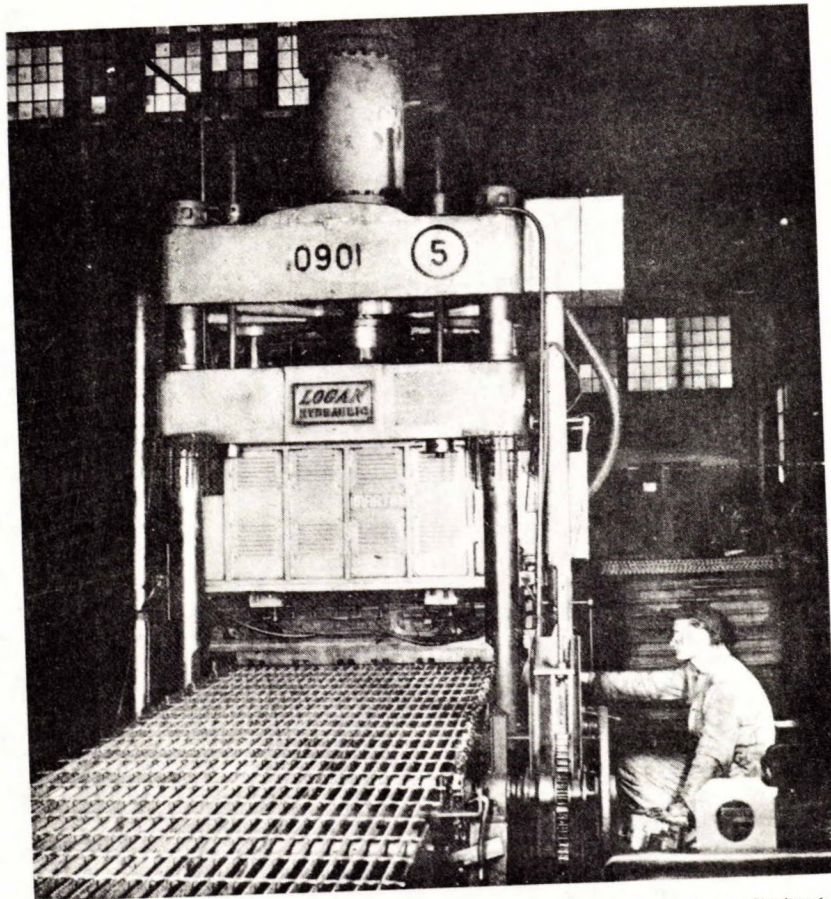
Giant duplex spot welder, with 6 ft throat depth, to join $3/4$ in. steel plate. Intended, but not used, for ship construction. (Reference 15, p.316)
